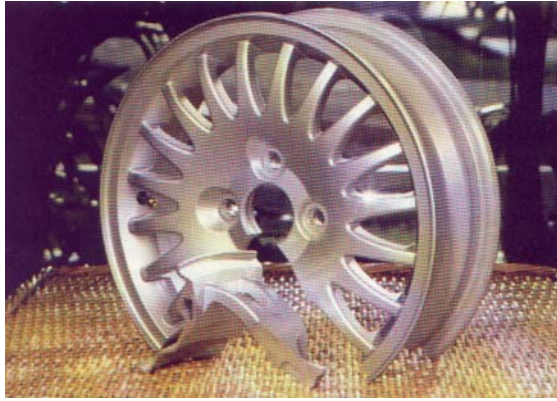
Friction stir welding used in joining wheel components. © Hydro, Norway.
